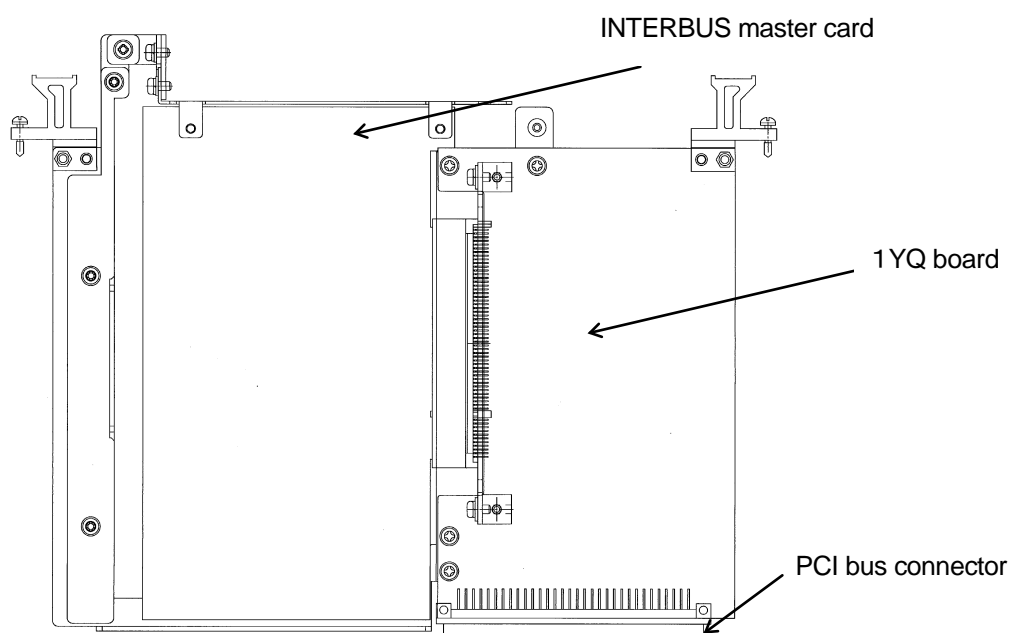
Interface board with IINTERBUS master and 1YQ board connected (Front view)
